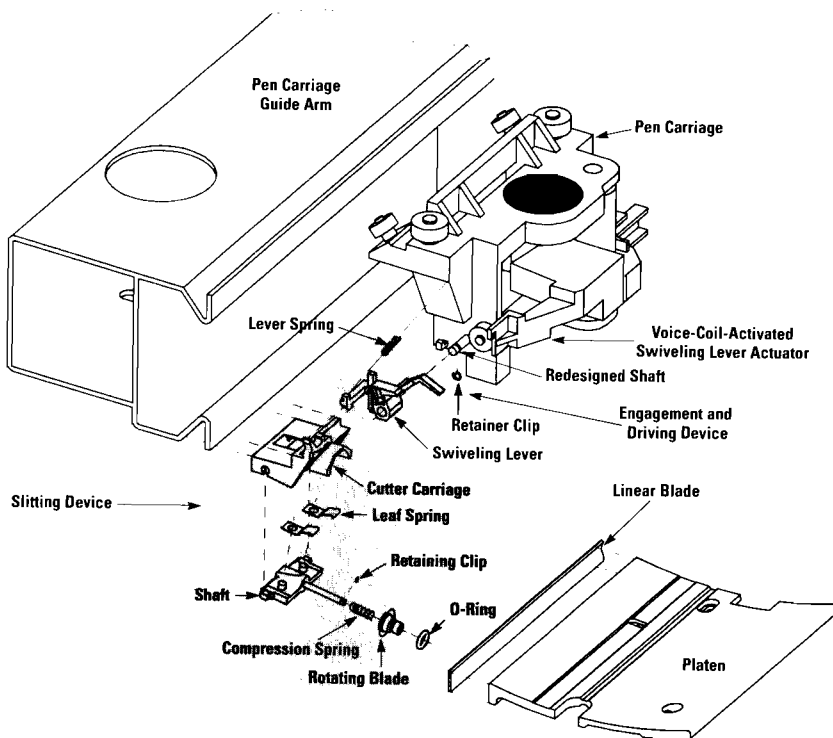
Exploded view of the automatic cutter, showing the two main parts: the slitting device and the engagement and driving device.
